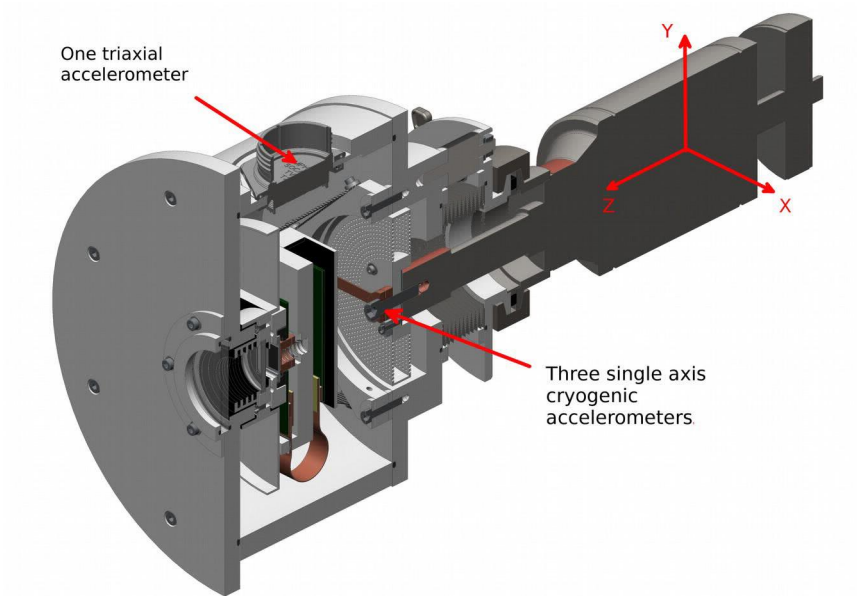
Drawing of the assembled cryostat and cryocooler showing the location of the accelerometers used in testing and the axis of
